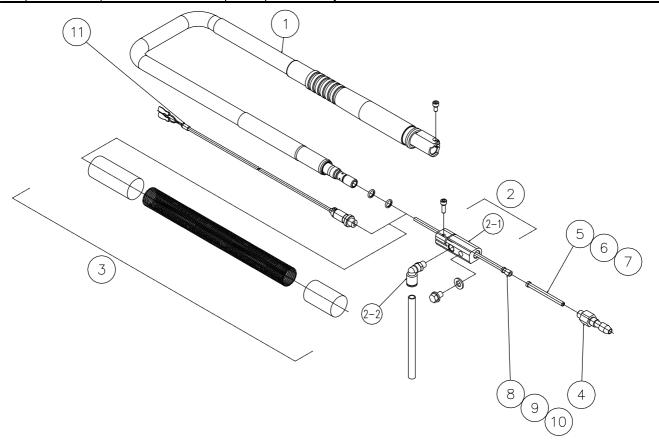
Exploded diagram for the coaxial power cable (For B6 type manipulator)
